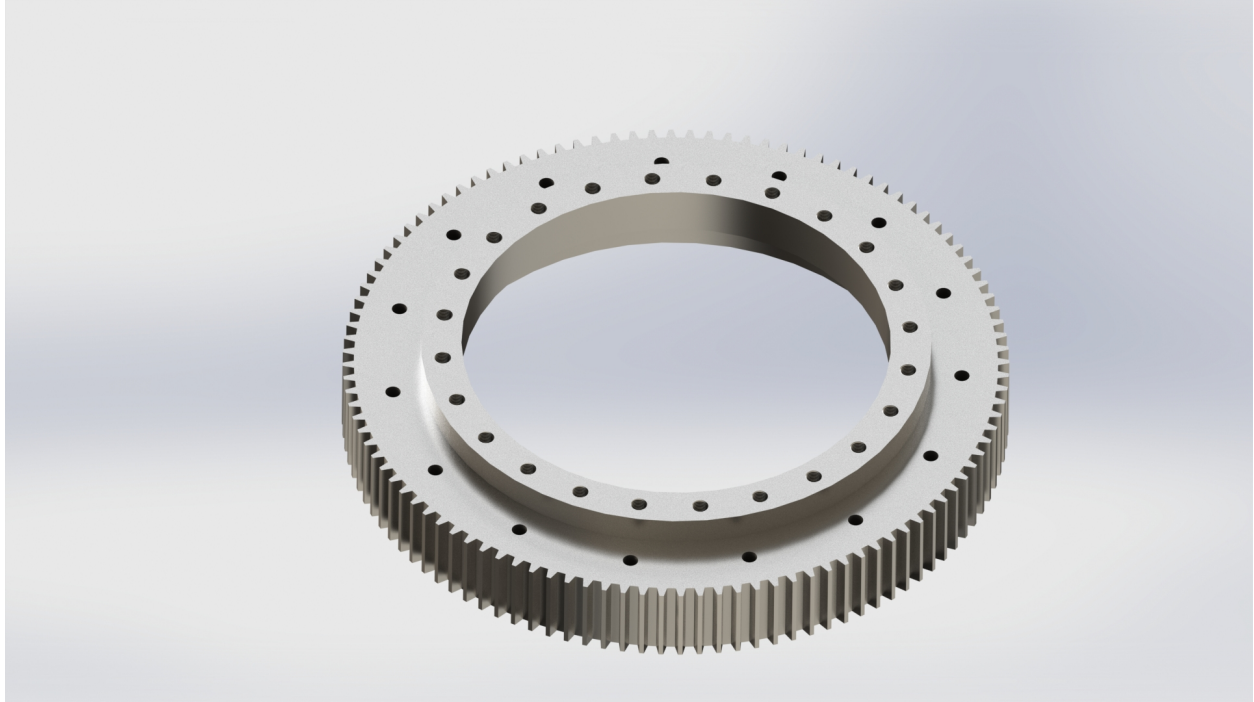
Solidworks Rendering of the Customized Tiller Gear for the Rotation Mechanism of the Aerial Apparatus
